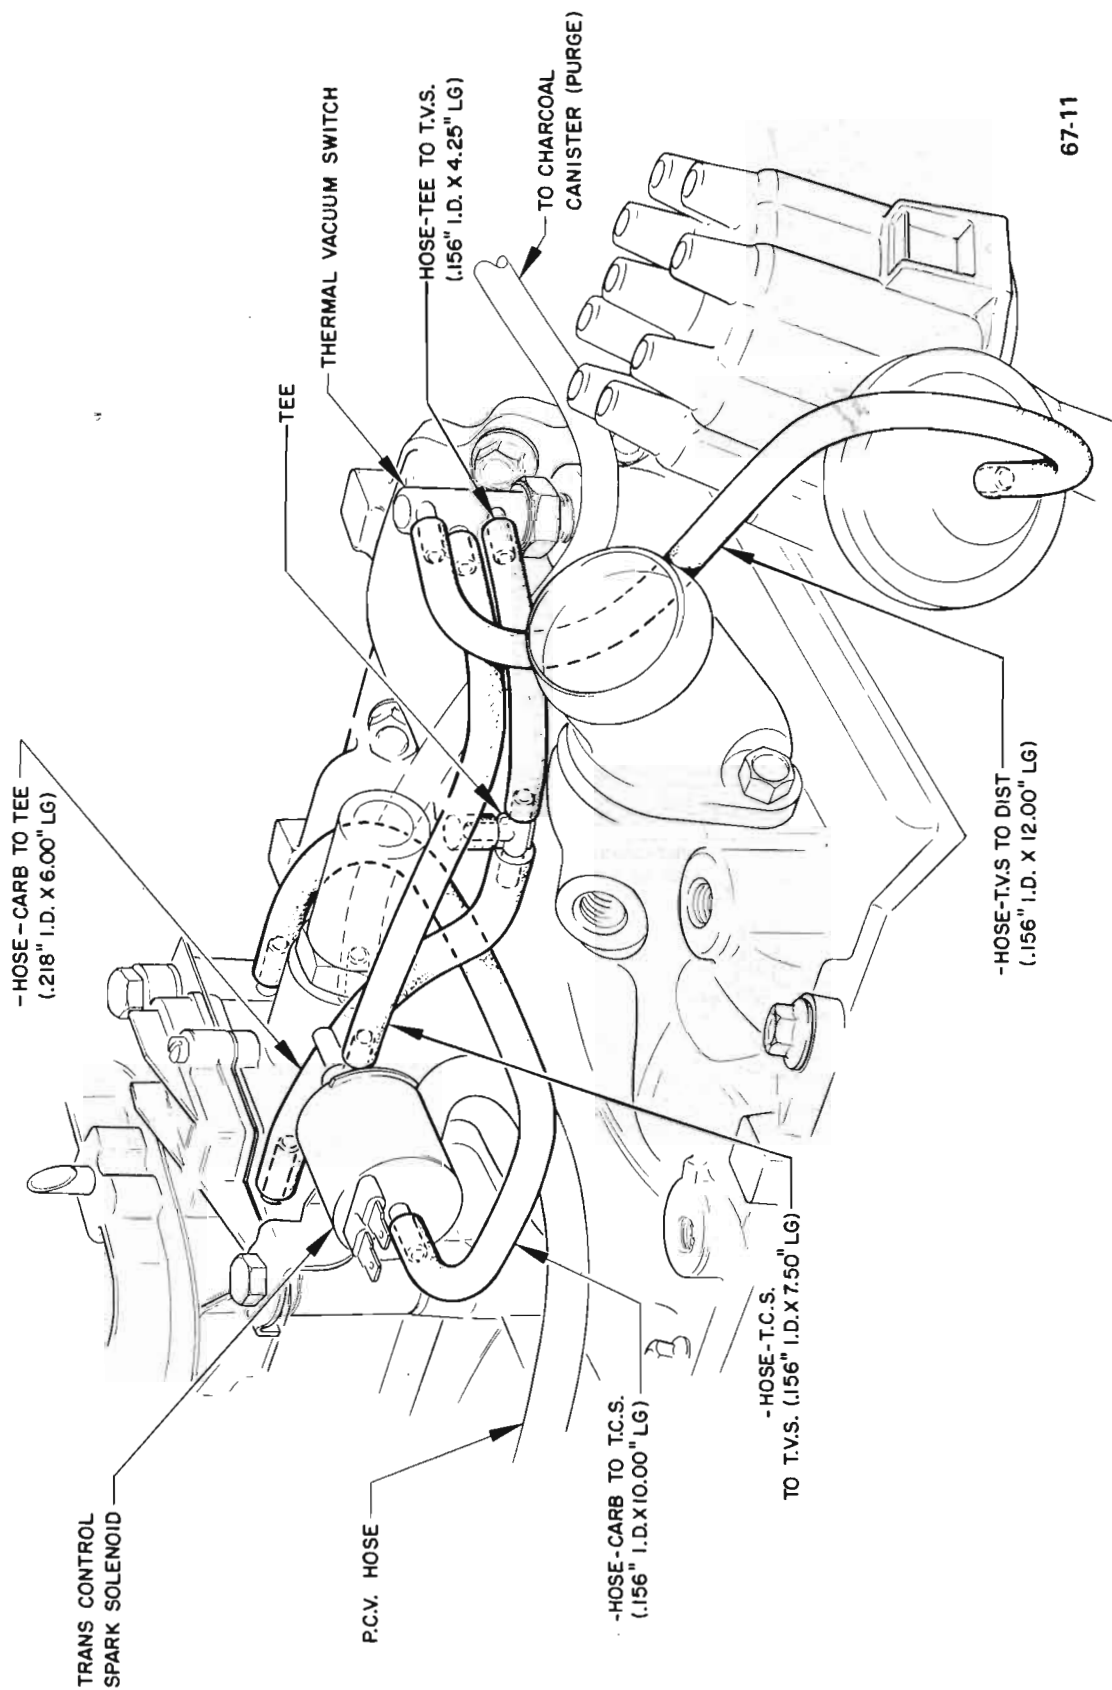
Vacuum Tube Routing - 350-4 Barrel With A/C and/or Heavy Duty Cooling and All 455 Engines
